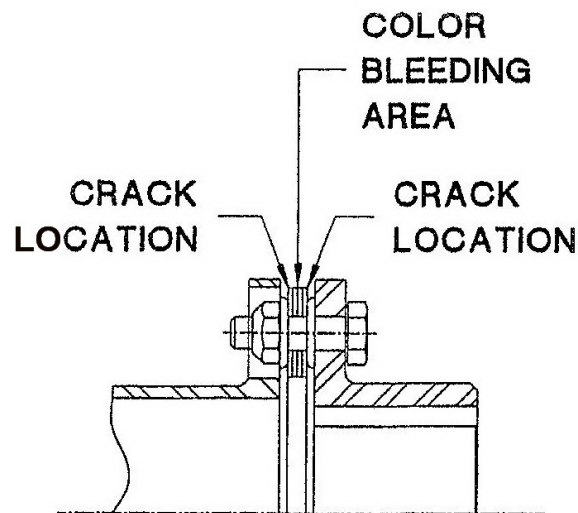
Fatigue failure due to excessive misalignment.
